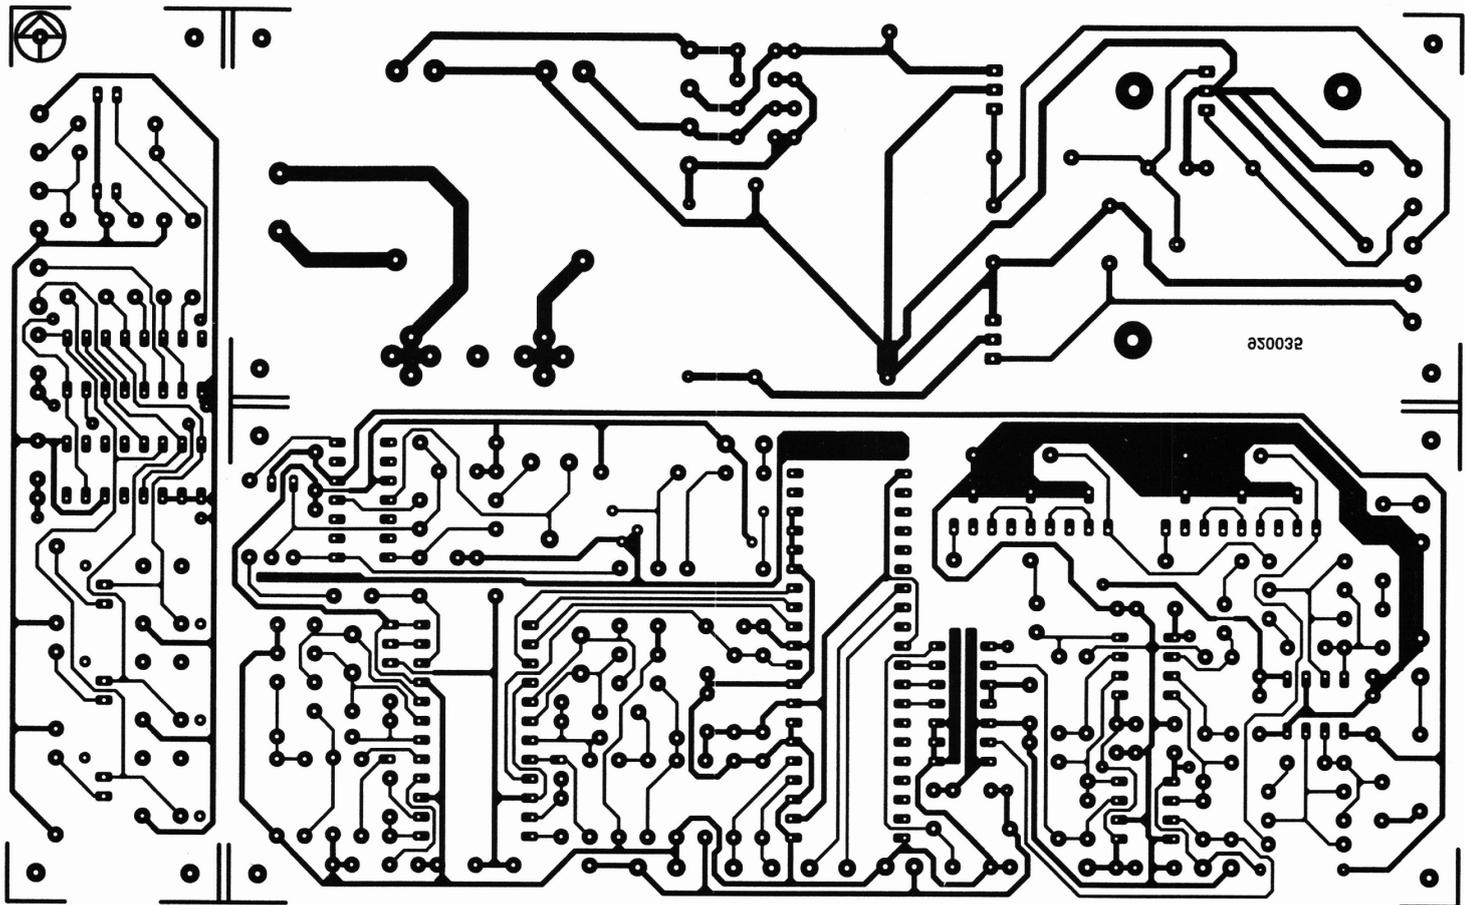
Track layout and component mounting plan of the single-sided PCB for the NICAM decoder.
